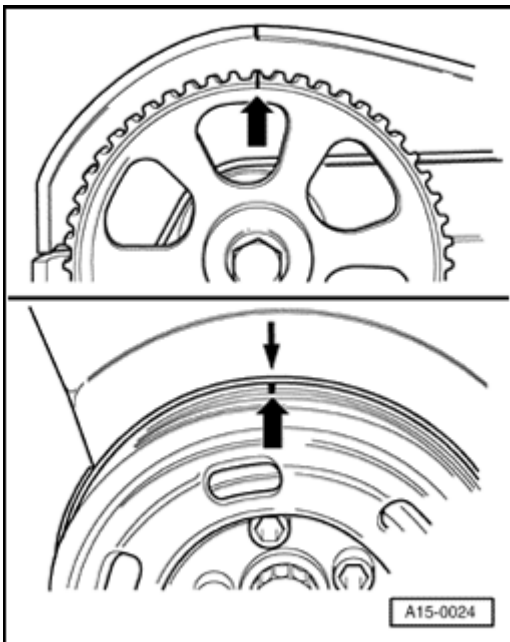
Setting Crankshaft To Markings For TDC Of No. 1 Cylinder
